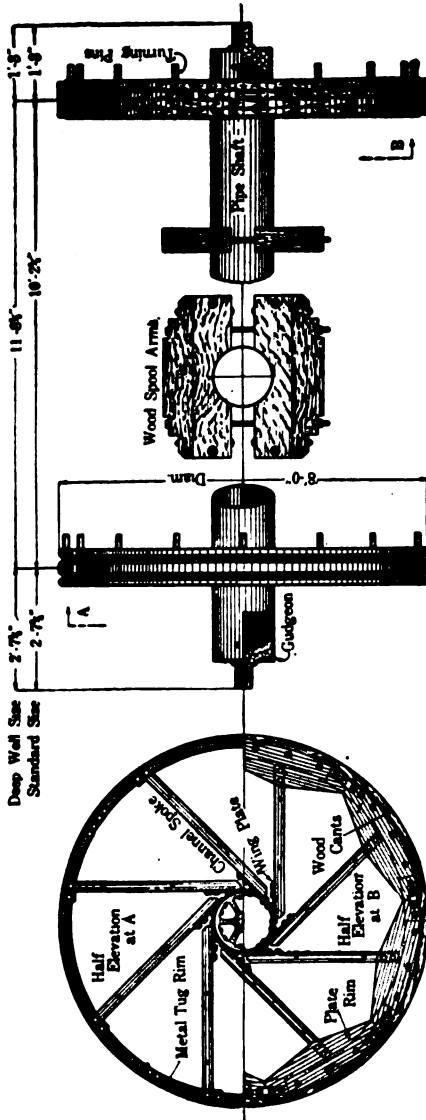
Carnegie Steel Bull Wheels fitted with wood cants for tug and brake. Standard Size—14' 6" over gudgeons, shaft 18" O. D. Pipe, $\frac{3}{8}$ " thick. Weight, approximately, 3,400 lbs. Deep Well Size—15' 11 $\frac{1}{2}$ " over gudgeons, shaft 18" O. D. Pipe, $\frac{3}{8}$ " thick. Weight, approximately, 3,600 lbs. Cast iron gudgeons, spoke type, inserted in end and riveted to shafts.
